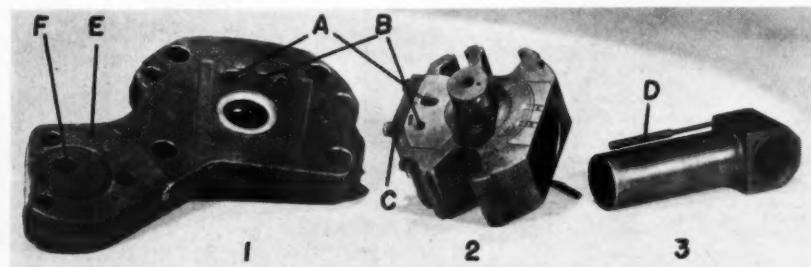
THE THREE PRINCIPAL PARTS OF THE COMPRESSOR.
